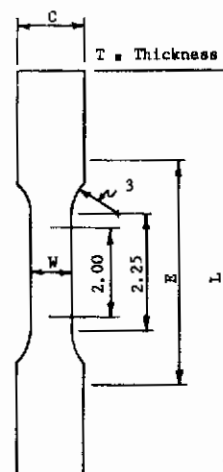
SPECIMEN FOR PLASTIC SHEET, PLATE & MOLDING
